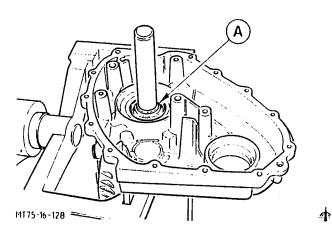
Remove transmission mainshaft bearing. A - Special Tool 16-044
